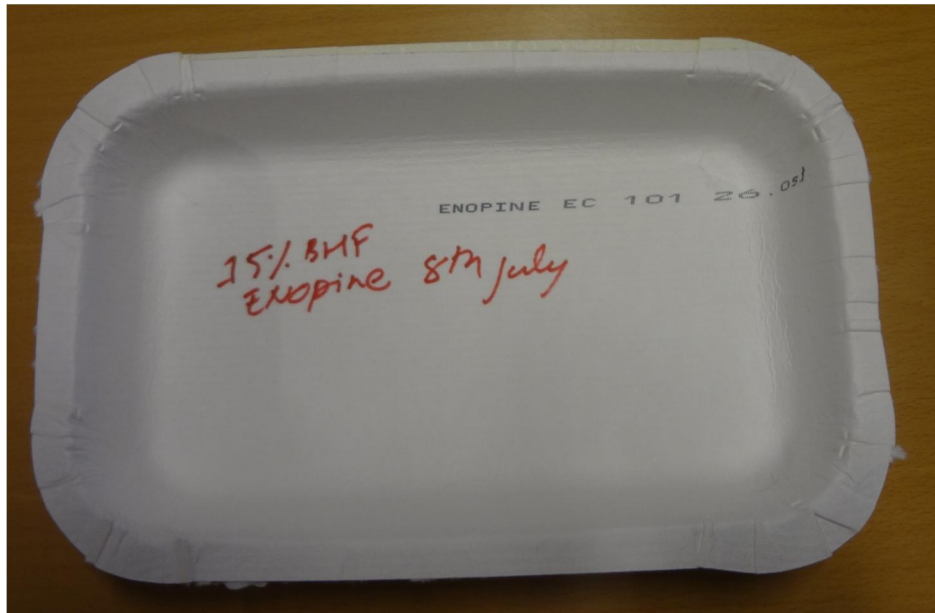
Ruptures in sample Conditioned Enoforte with 15% blank holding force.
